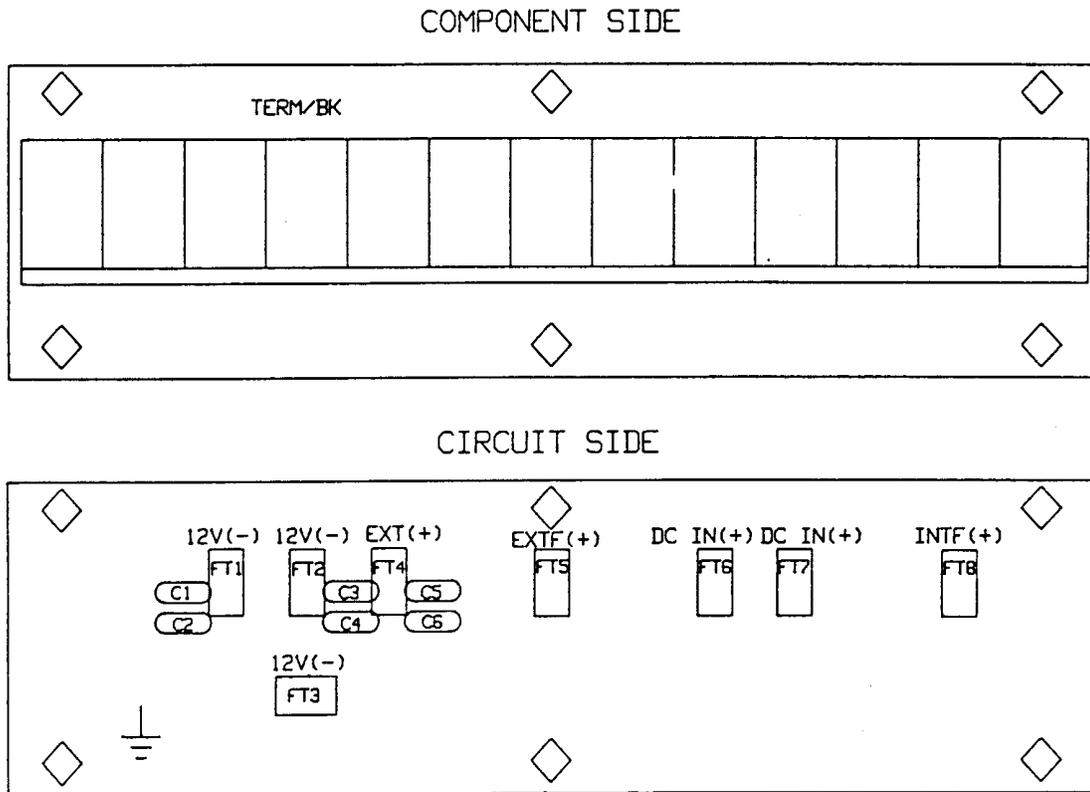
A3 Charger Board Assembly, Schematic Diagram
